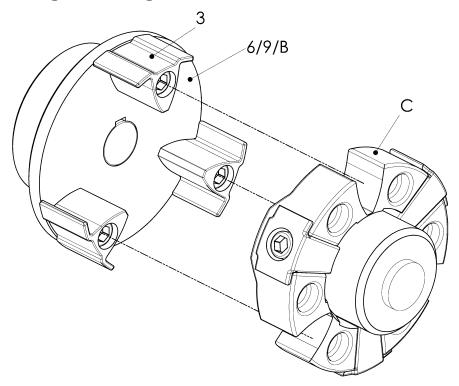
Connecting the driving and the driven units (design -1000...3000)
